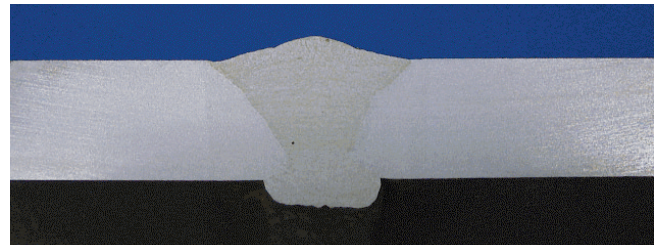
Butt weld with ESAB's tandem welding system with LAF635. Filler material first wire PZR6105R/1.6 and PZR6105R/1.4 second wire. Weld speed 2.5 m/min, weld parameters 550A/128V and 350A/23V. Sheet thickness 5 mm.
